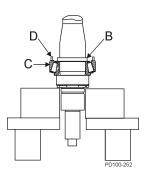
Install Inner & Outer Spacer and Lower Cup
